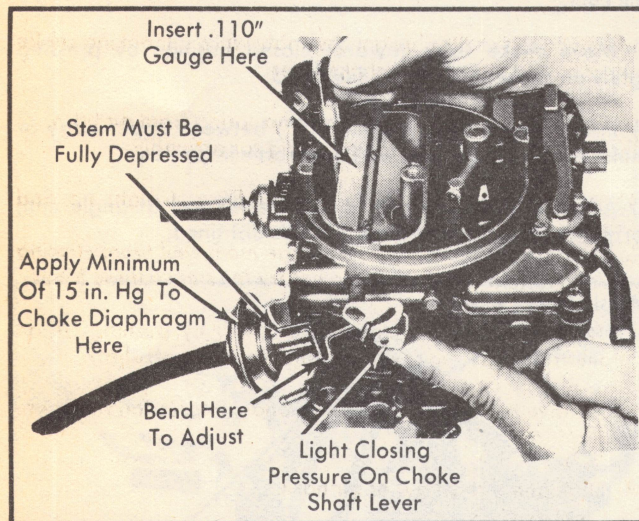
View Of Carburetor Showing Choke Vacuum Kick Measurement & Adjustment Locations
